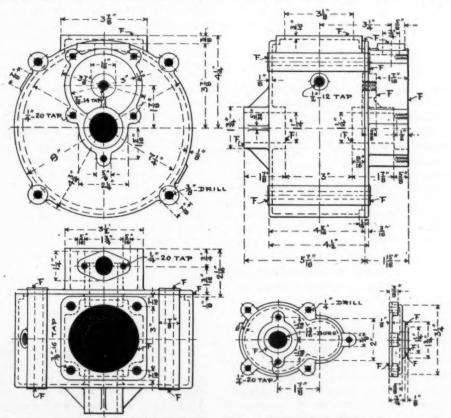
CRANK CHAMBER AND GEAR BOX COVER.
